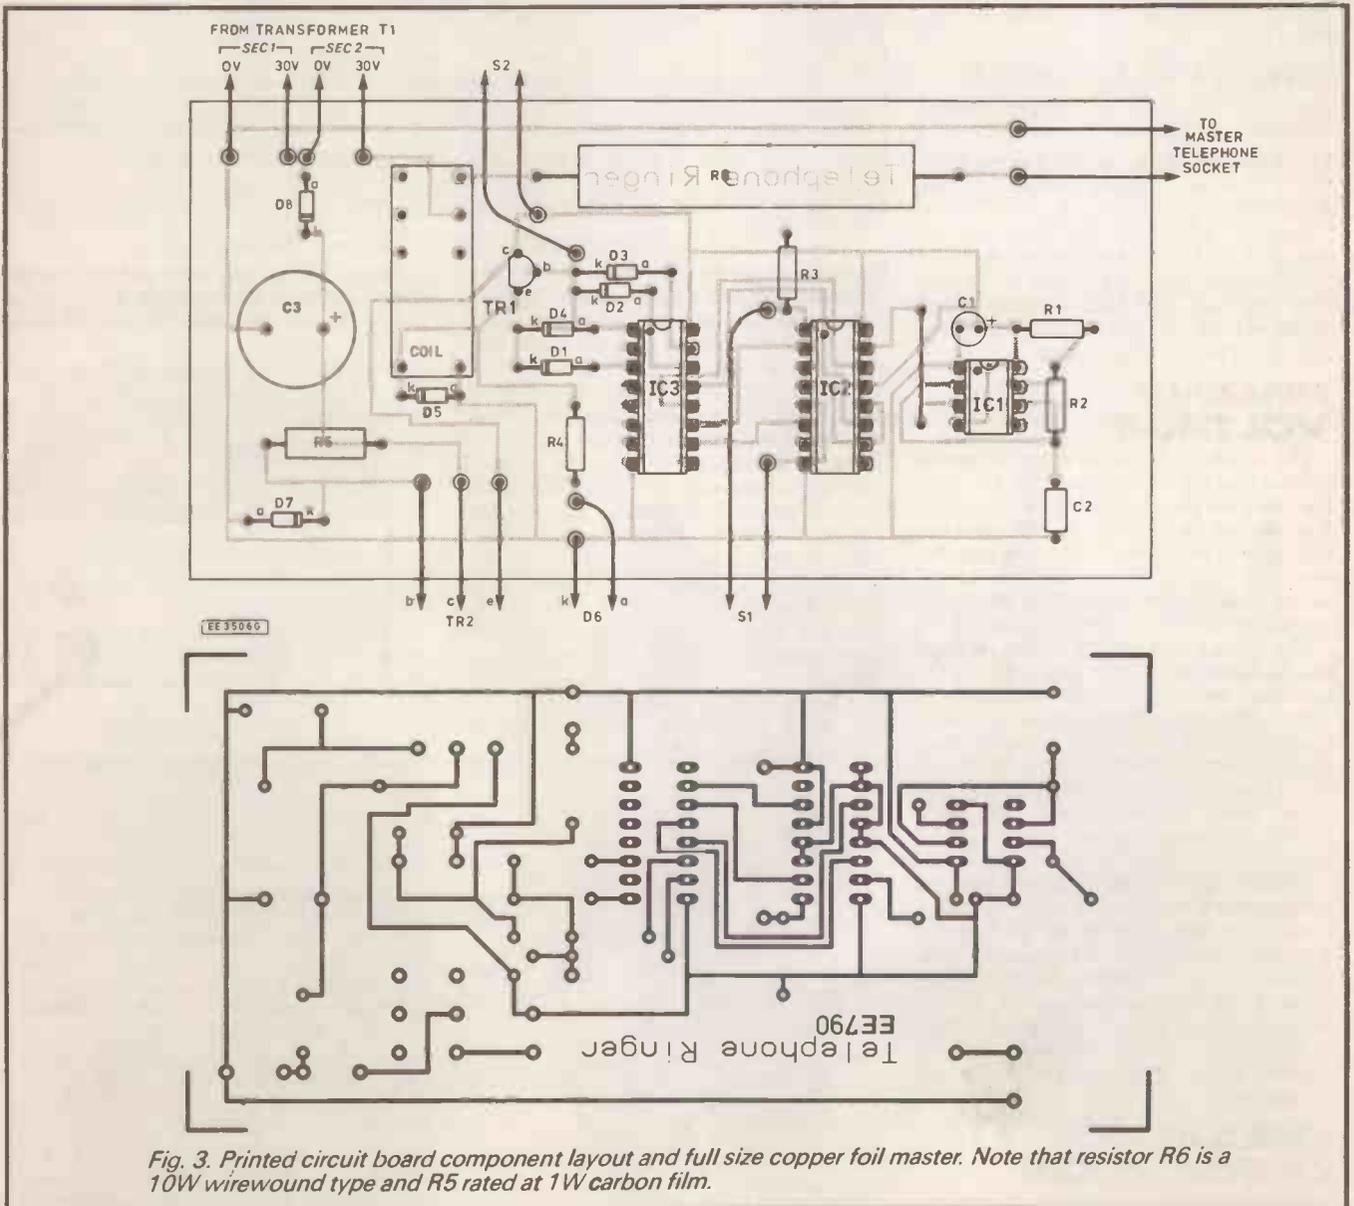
Printed circuit board component layout and full size copper foil master. Note that resistor R6 is a 10W wirewound type and R5 rated at 1W carbon film.
